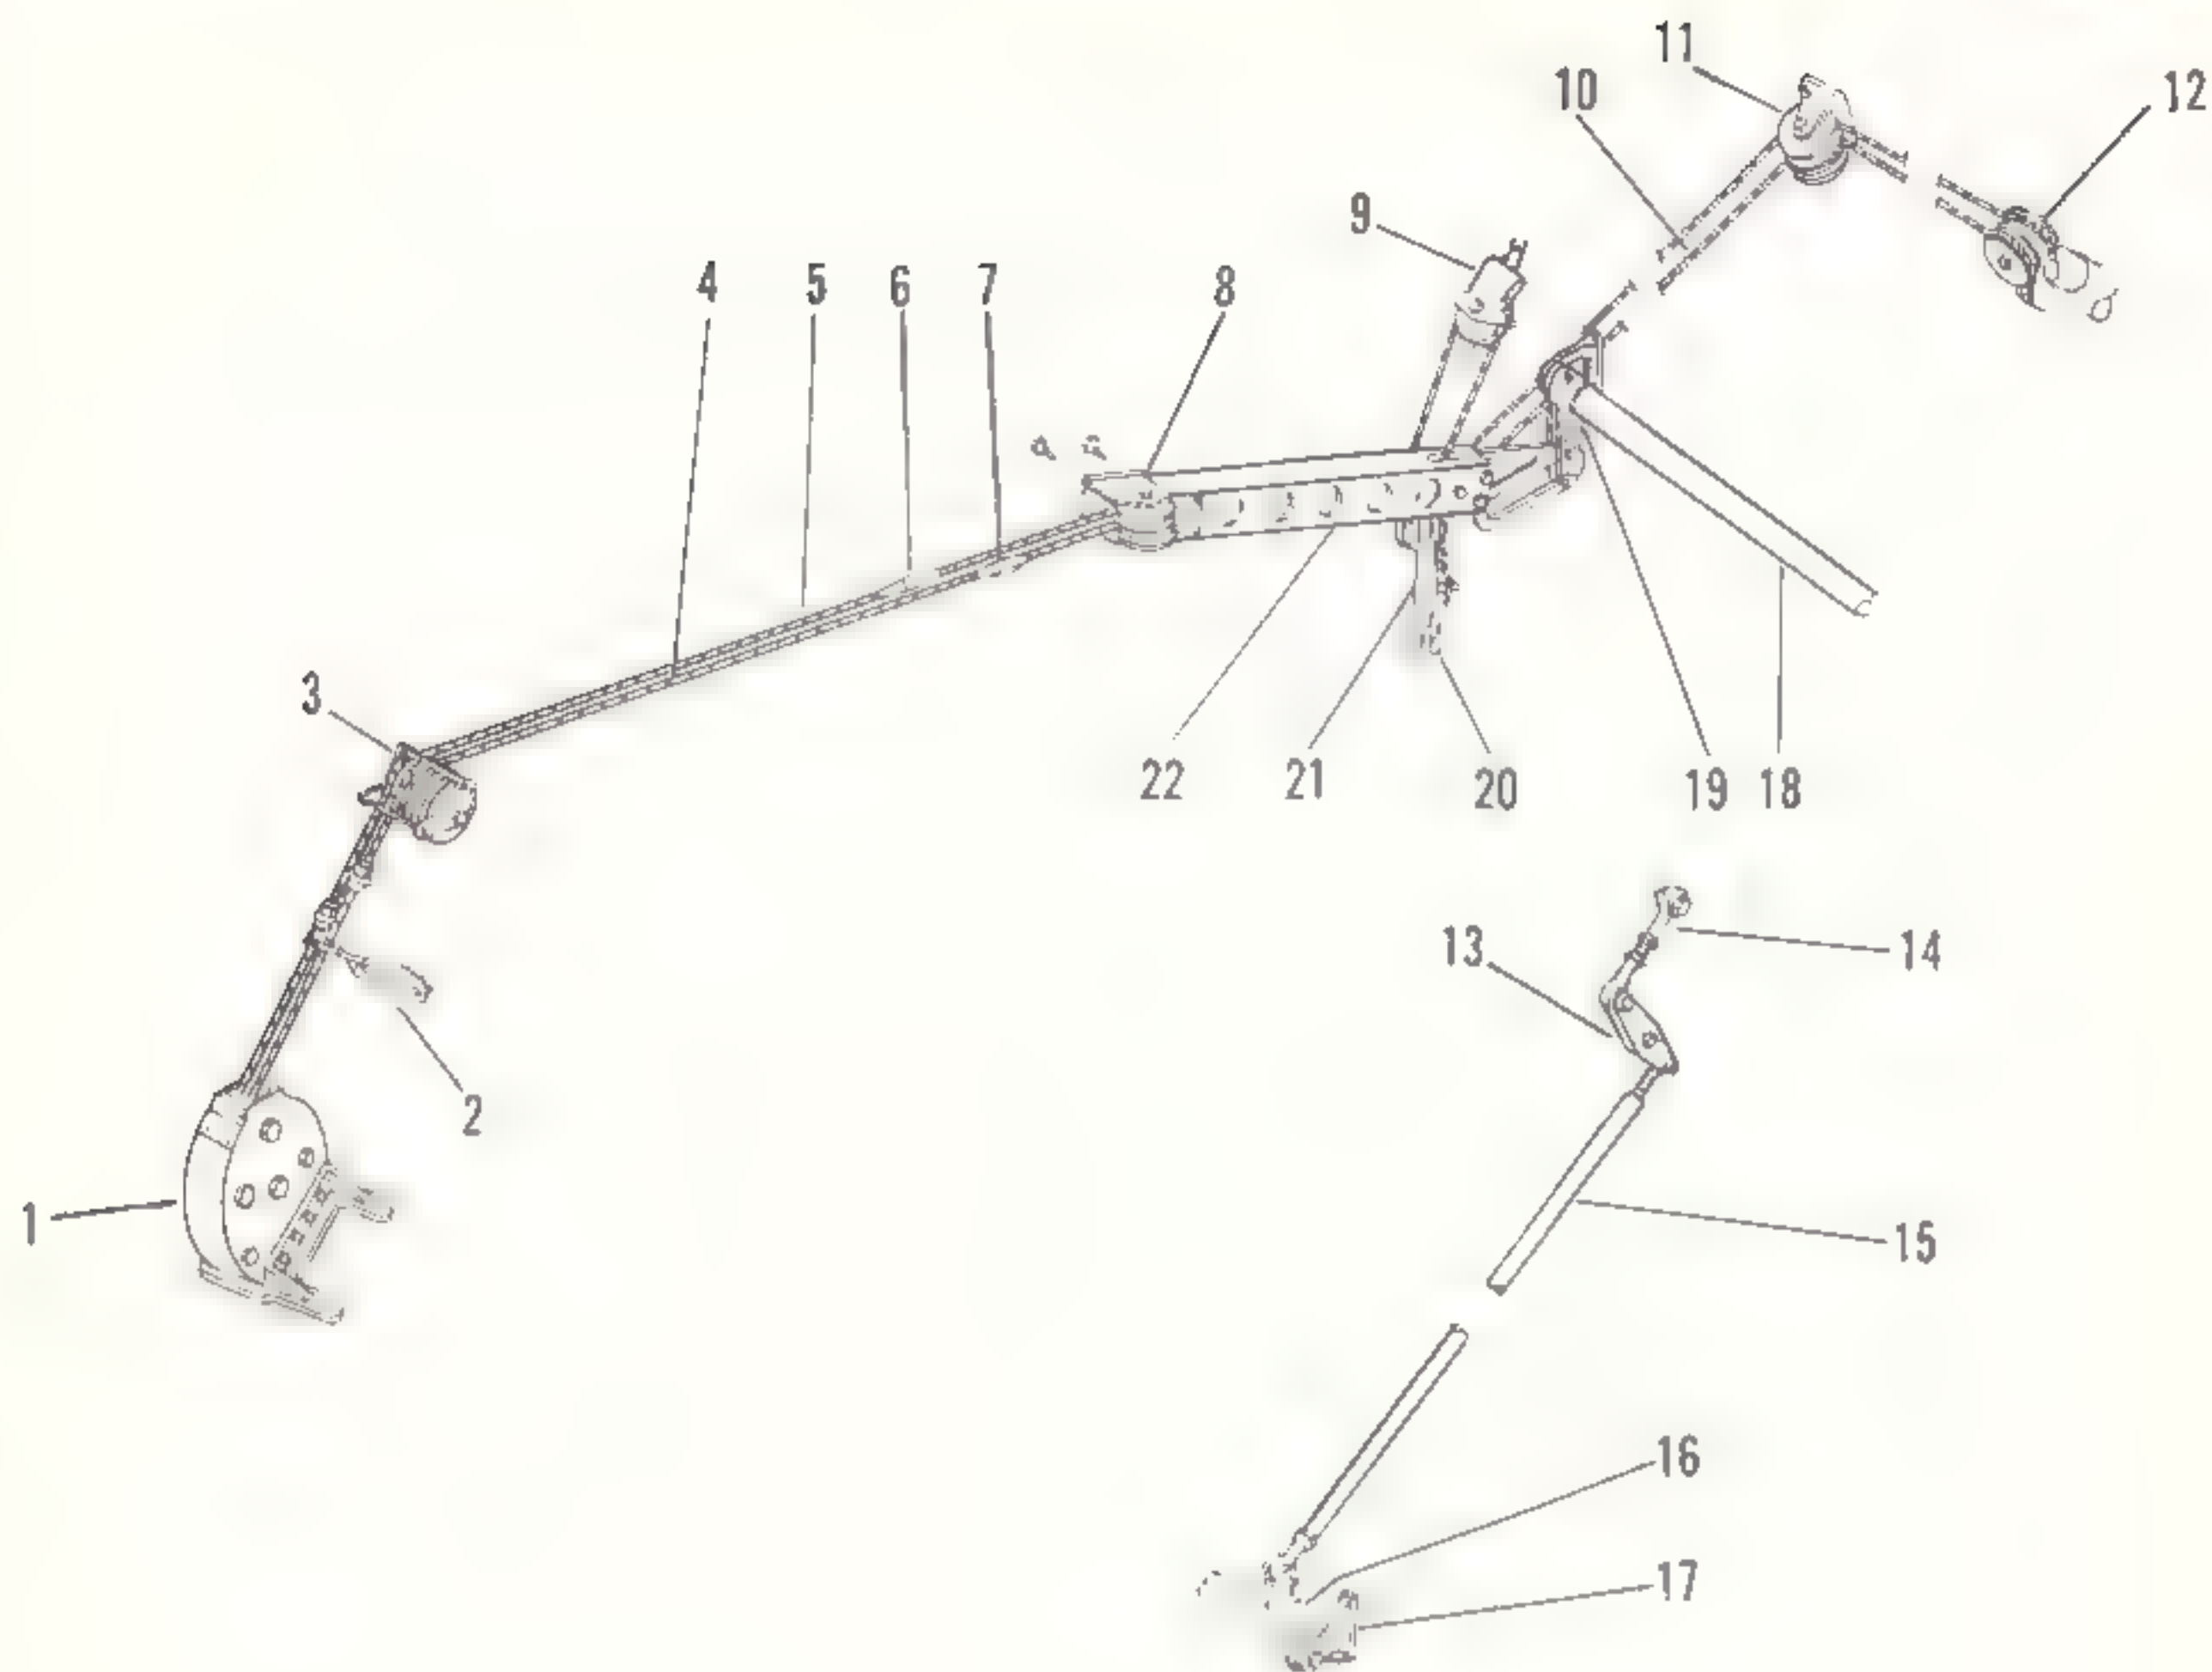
Throttle control system (helicopters serial No. 55-4462 and subsequent)
